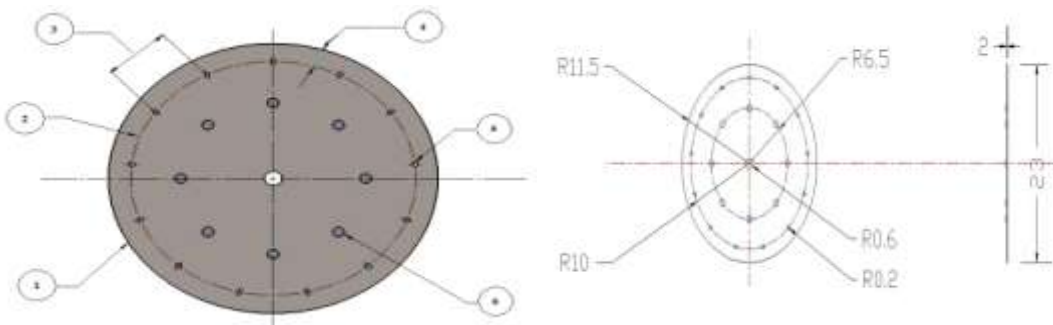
Schematic diagram dimensions of holes on vacuum seed plate.
